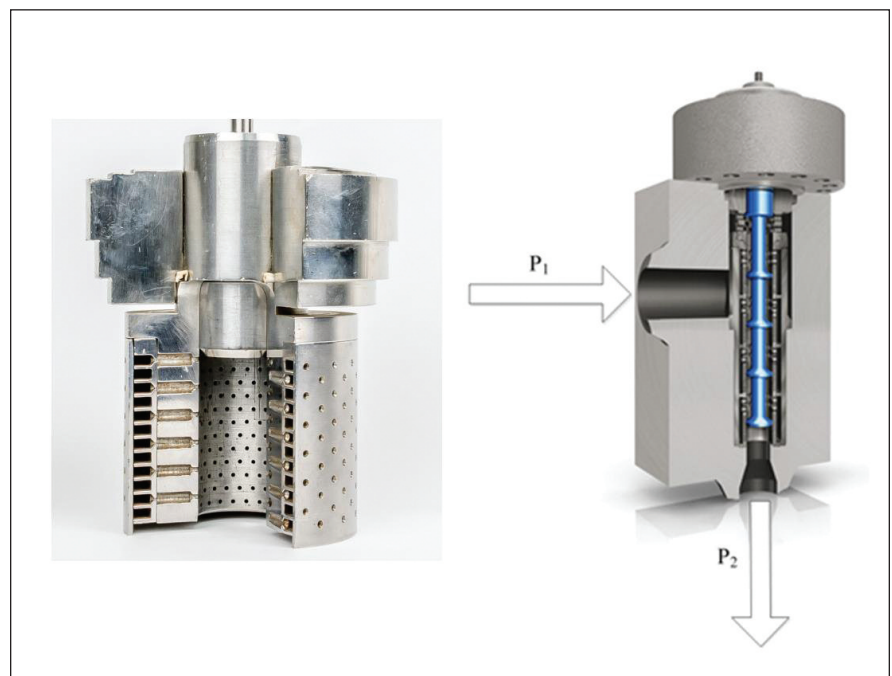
Drilled-hole cage (left) and angle body with drilled-hole cage and axial pressure staging (right)
